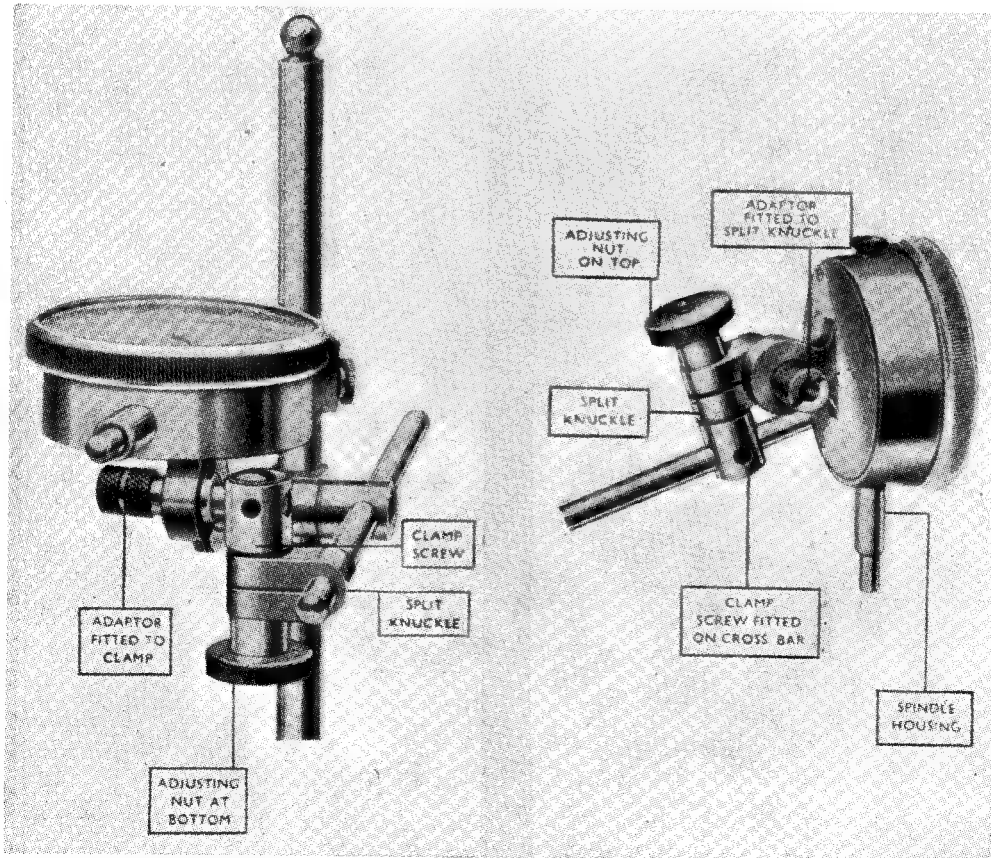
Methods of mounting dial gauges, using the special adaptor
